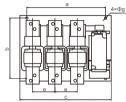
CKJ5-630 Appearance and Installation Dimensions
